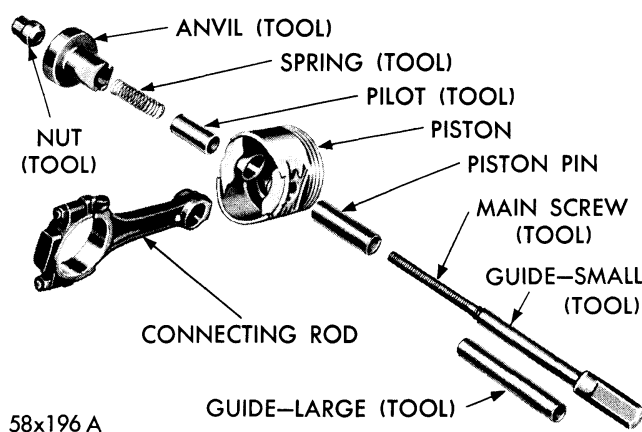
Tool arrangement for installation of piston pin—361 cu. in. engine
